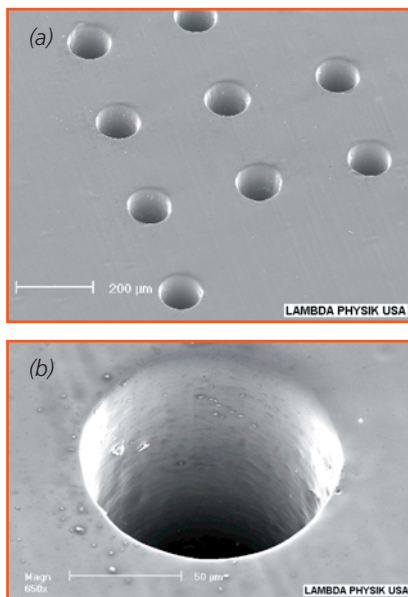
Holes trepanned in 0.55 mm-thick stainless steel with 4W UV beam: a) overview; b) close-up of entrance side. Hole diameter is 110 µm.
